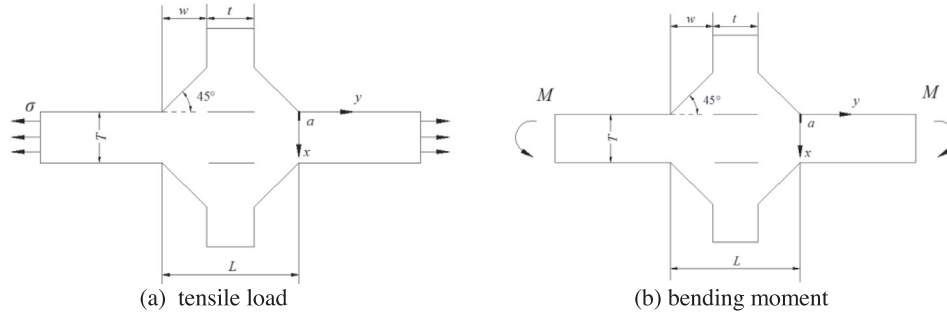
Fillet welded joint under tensile load or bending.
